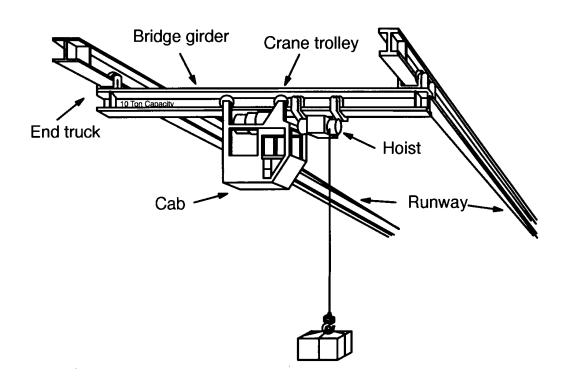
Top-running single-girder bridge with underhung trolley hoist.
